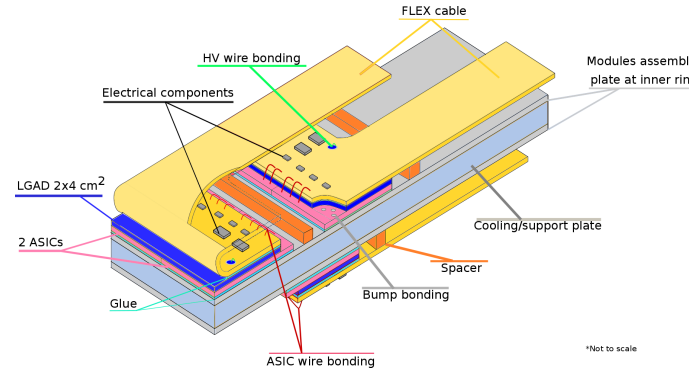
Schematic drawing of two adjacent modules on the top side and one on the bottom side of the cooling plate; the modules are mounted on thin support plates. The first flex cable is folded, while the others are straight.
